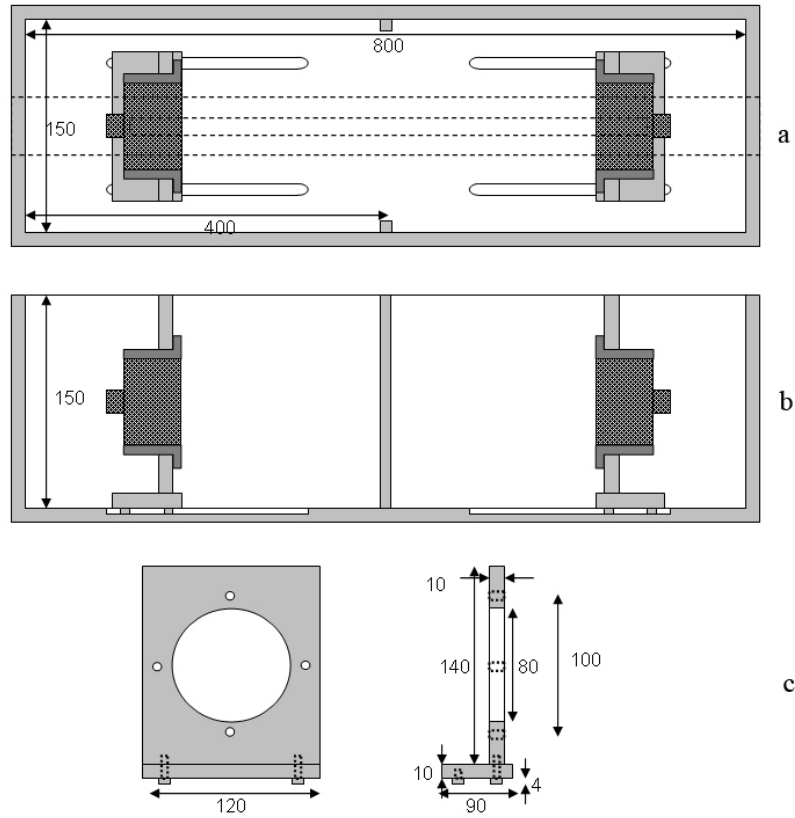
Mechanical drawings of the tank: a) view section at mid height showing transducers mounted in holders b) side view section on acoustic axis showing transducers in holders, c) transducer support bracket.
